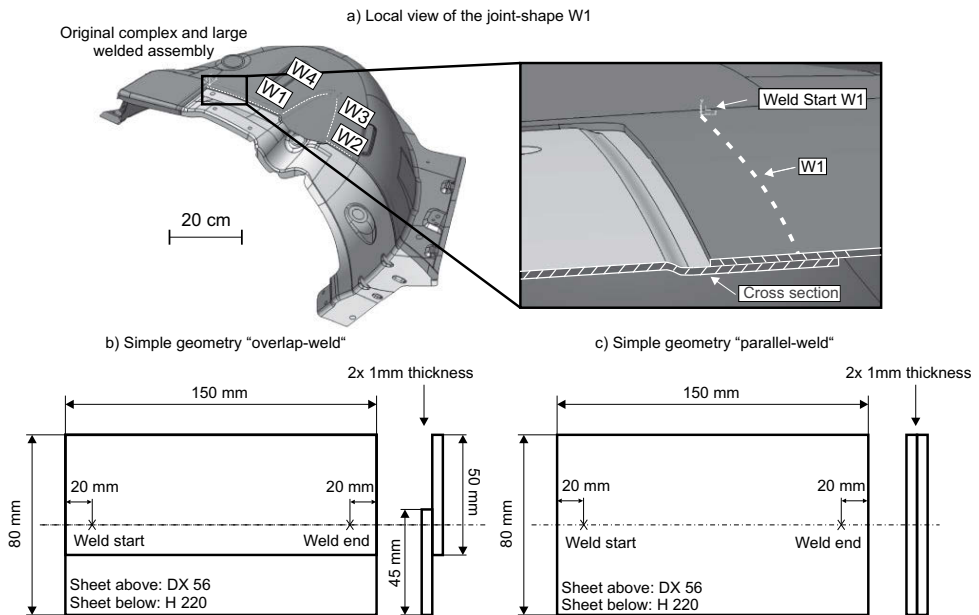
a) Cross-section of the joint shape W1 - b) dimensions the simplified geometries “overlap-weld” – c) dimensions the simplified geometries “parallel-weld”
